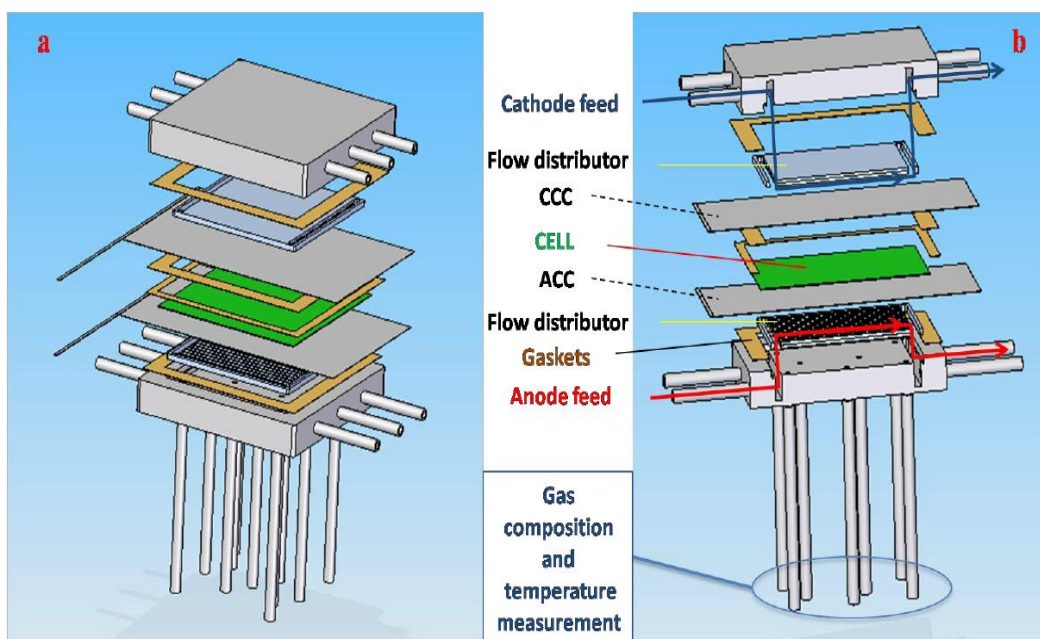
Exploded view (a) and cross section (b) drawings of the multisampling housing.
